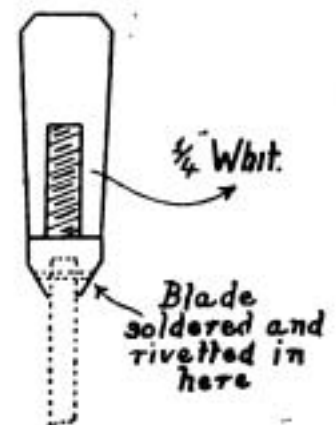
A.—METHOD OF SECURING BLADE AND HANDLE.
